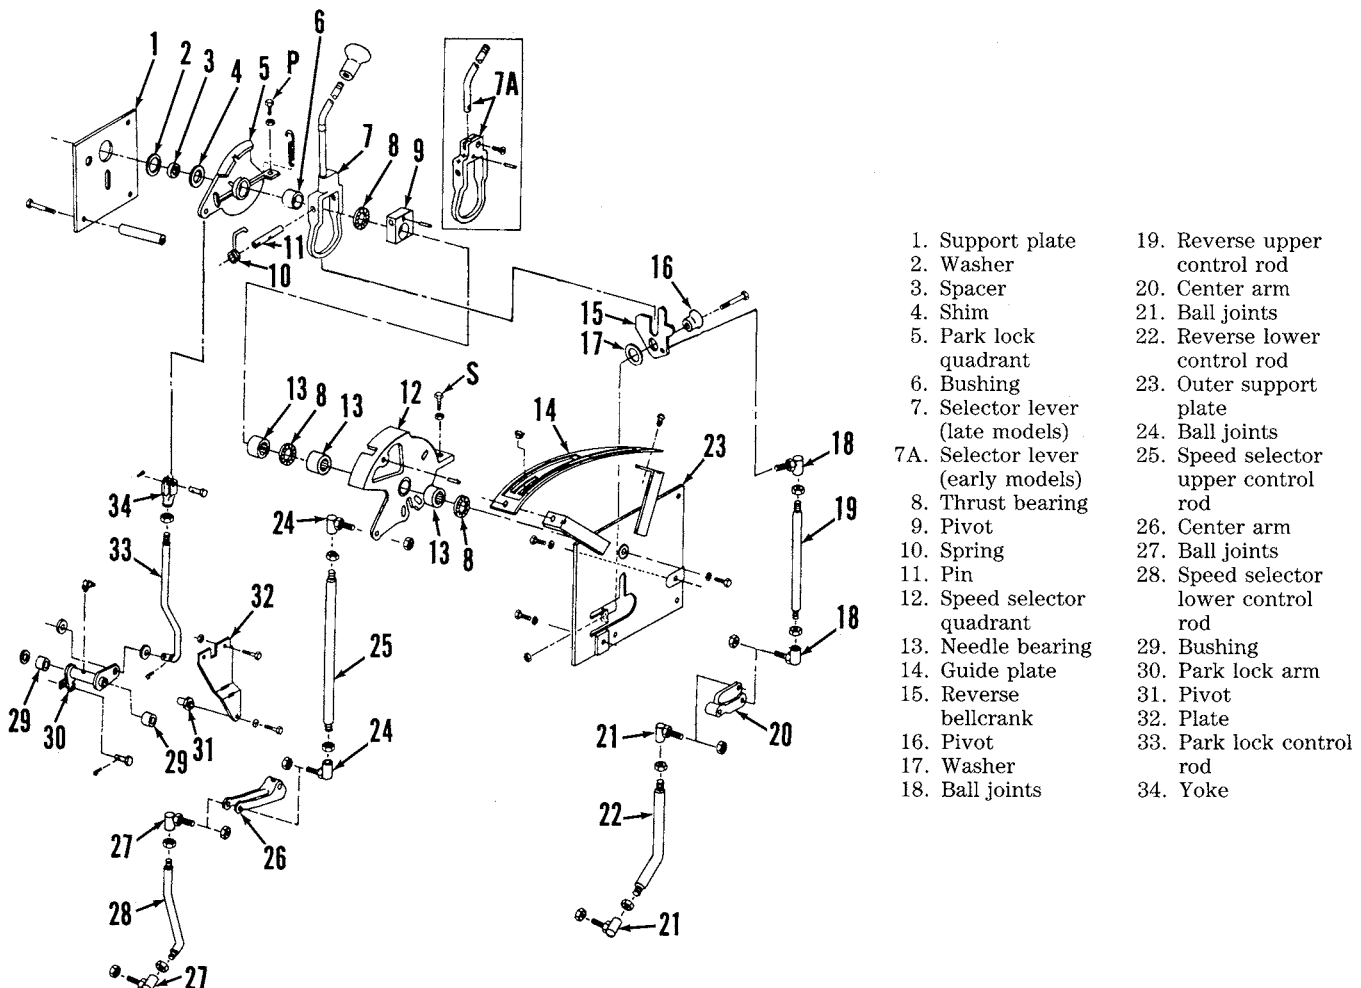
Exploded view of Power Shift control lever and associated parts.
